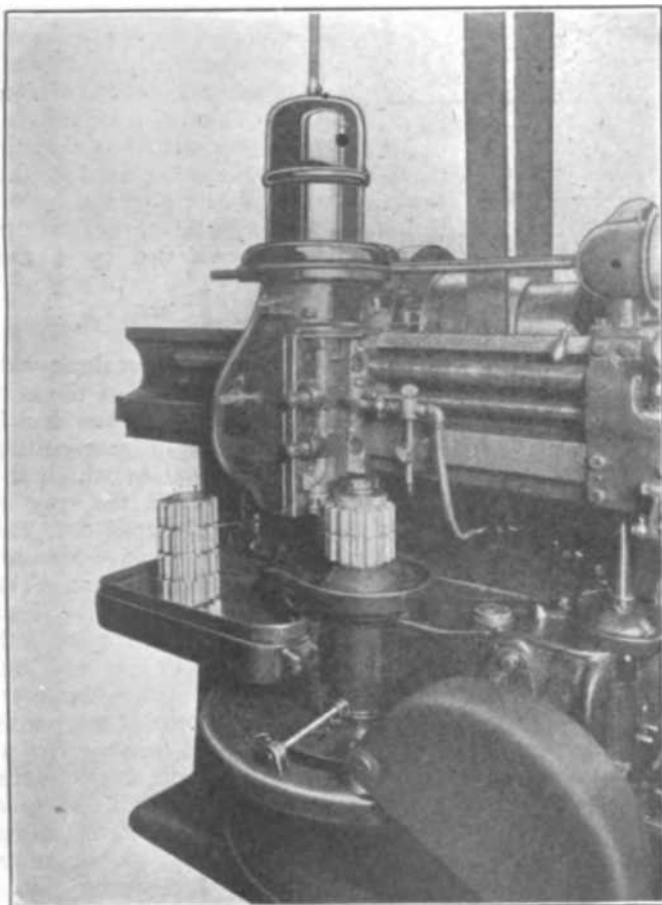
Gear shaper cutting two $\frac{1}{8}$ -pitch stub tooth pinions for tractor work
